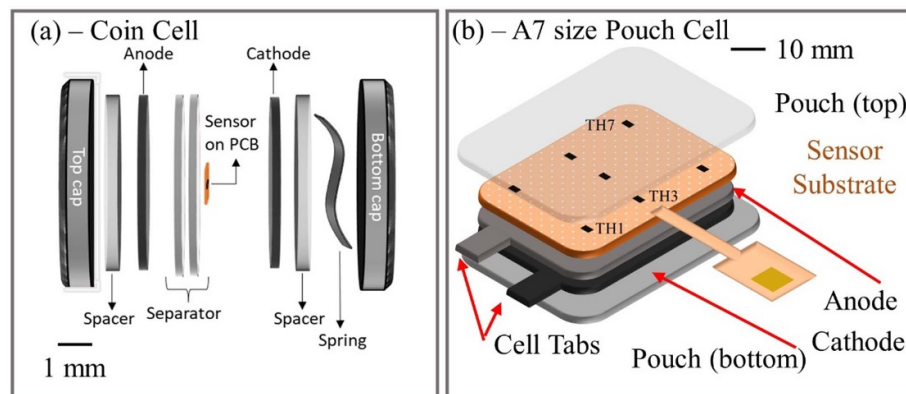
Diagrams showing assembly of instrumented cells with coated sensors (a) coin cell assembly (sample of sensor array placed on the separator layer in the centre of cell, facing cathode) and (b) A7 size pouch cell assembly (sensor array located on top of cell stack, affixed to the top layer of the separator, facing the anode).
